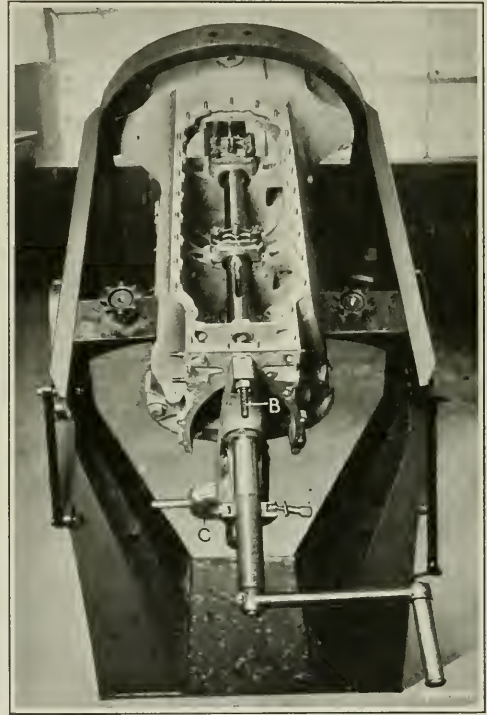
View of Reverse Side of Crankcase, showing Interior and Bar in Place
